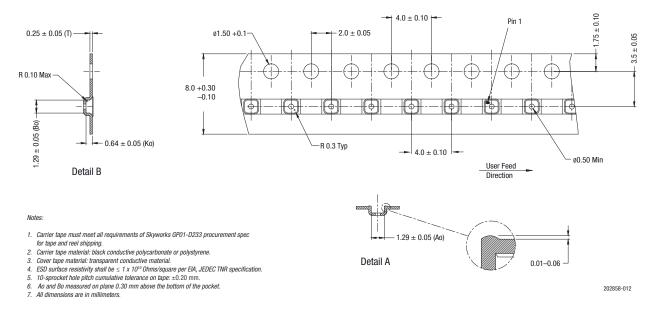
SKY13522-644LF Tape and Reel Dimensions
